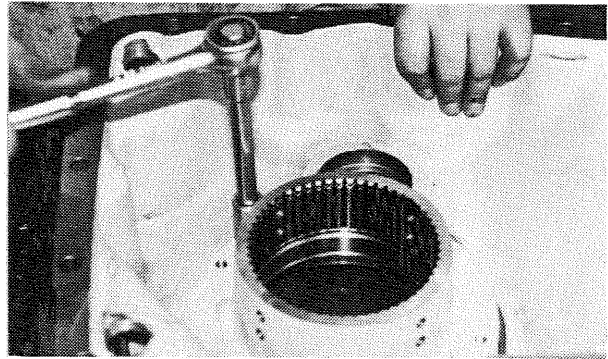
Front Cover & Brake Removal & Disassembly (2 of 3)
